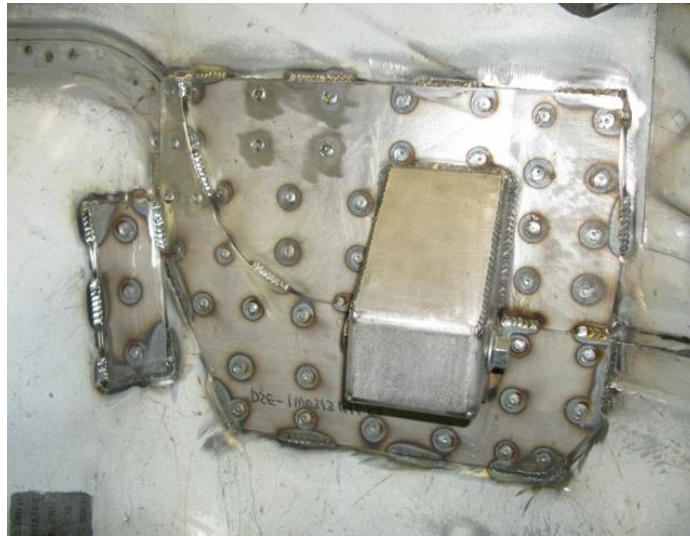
Stitch Weld Tunnel Doubler
